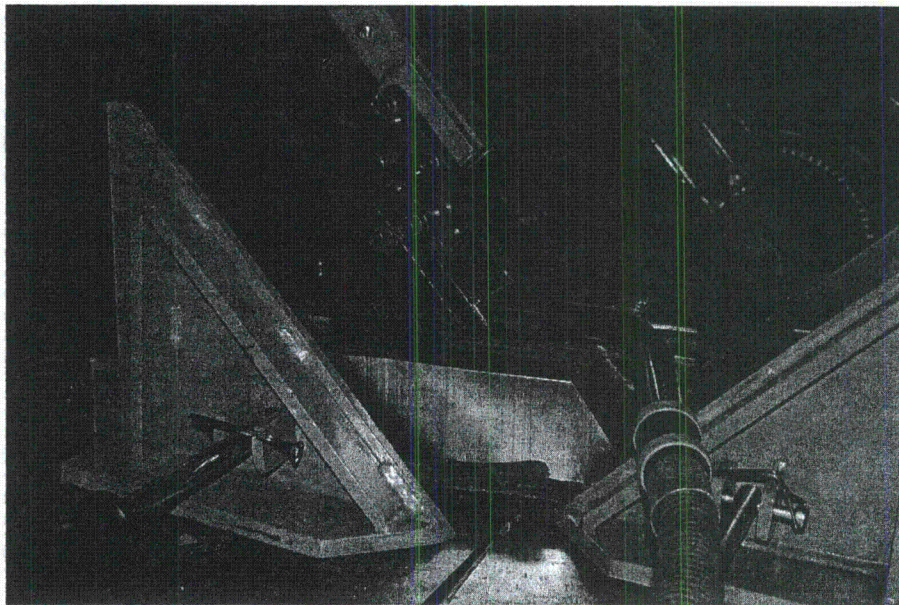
J-groove Weld Cut on the High Side
